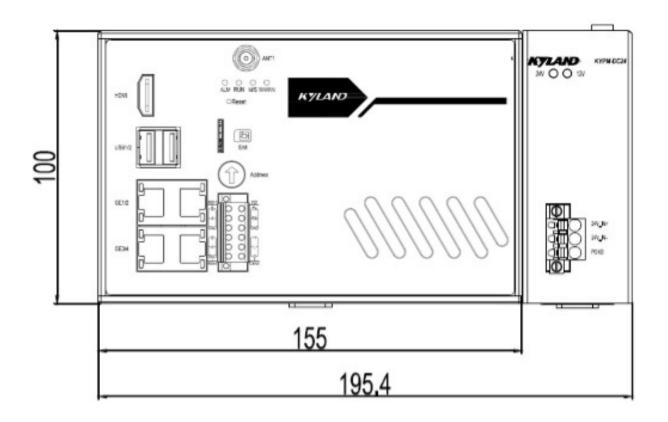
NewPre5100-P611-M2-D1-N1-W4 installation dimension drawing (Unit: mm)
